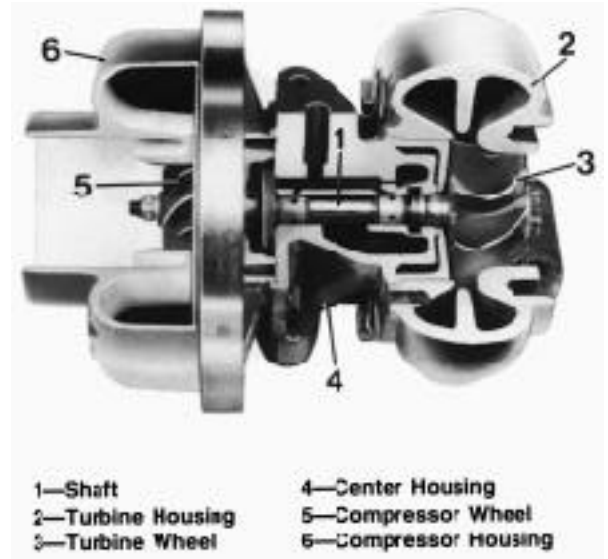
Turbocharger cross section. (Courtesy of Deere and Company.)
